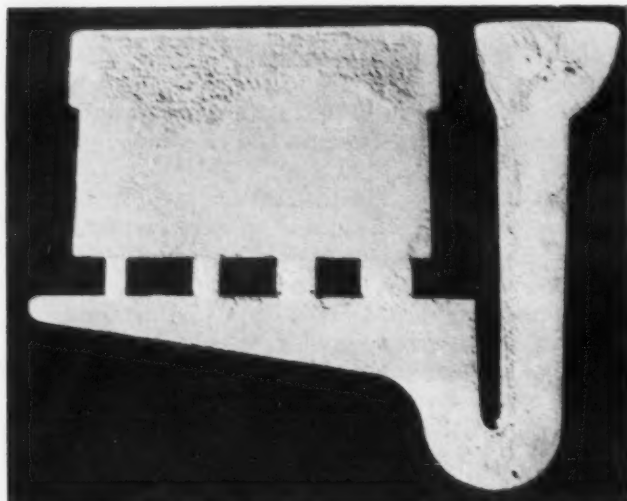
Back of experimental casting weighs about 13 lb, made with low-carbon steel in a silica sand-resin shell mold.
